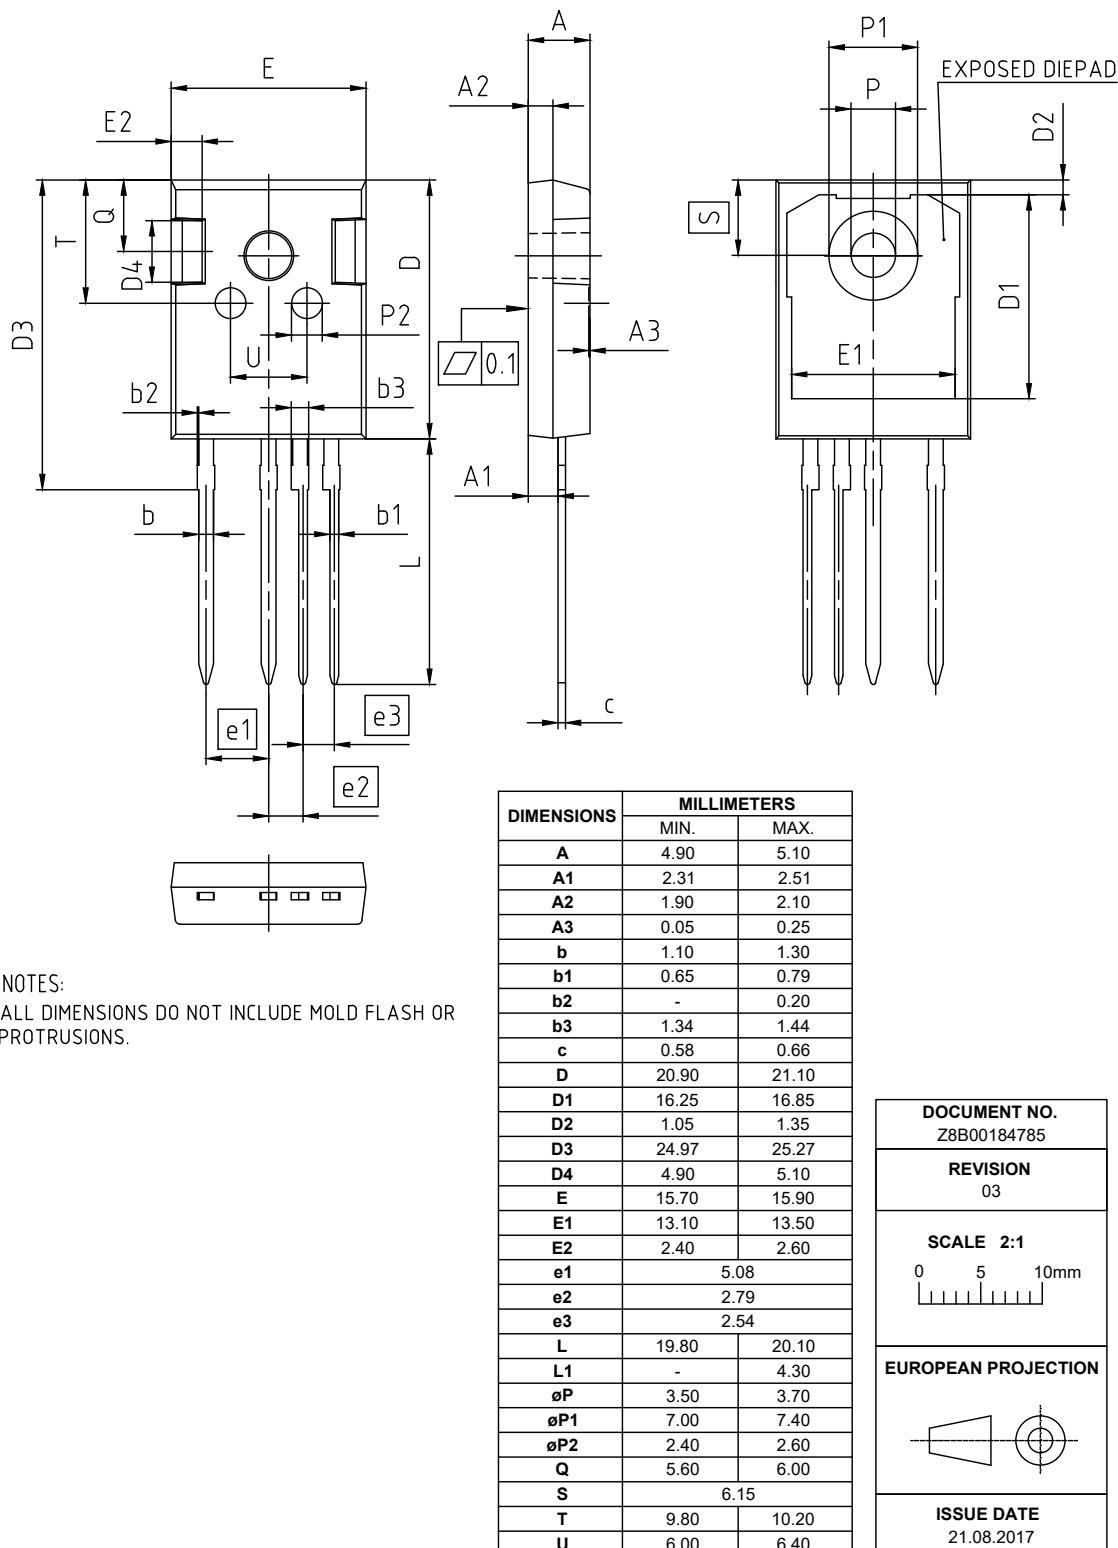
Outline PG-T0 247-4-3, dimensions in mm
